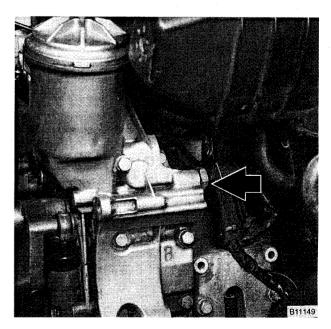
Oil pressure switch location on M50 engine (arrow).
